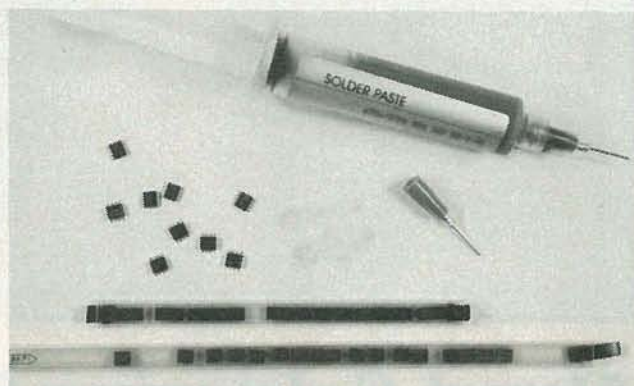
SOLDER PASTE OR CREAM is available in a syringe. That makes dispensing the paste or cream convenient, once you get the hang of how it's done!
